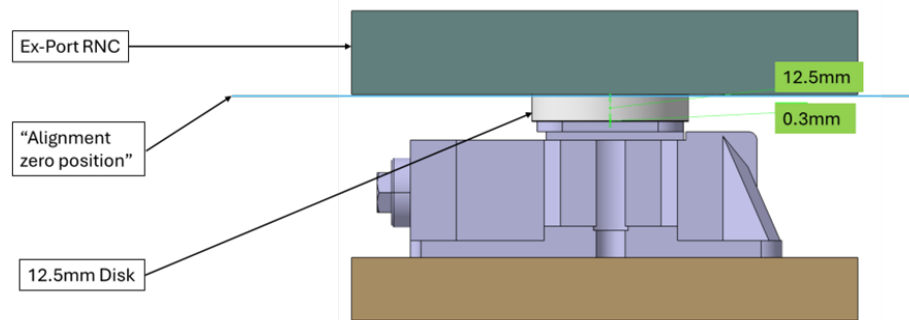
Ex-Port RNC mounted on the Fixator+Disk assembly in its *alignment zero position* ([86]).
